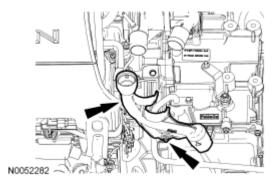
Identifying Cylinder Head Temperature (CHT) Sensor Courtesy of FORD MOTOR CO.
